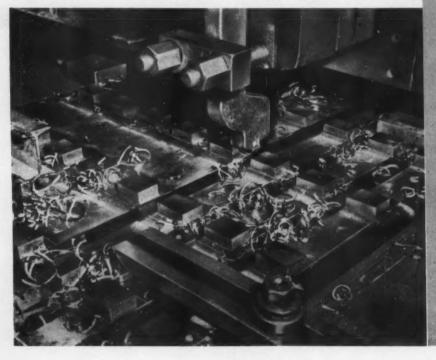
Close-up of slotting cuts in a flexible nozzle plate for the supersonic wind tunnel. The flex-plates were machined to approximately a 1/2-inch thickness from 4-inch-thick slabs of Stainless-W steel. About twenty different machining operations were required to achieve the tolerances and fine finishes.
